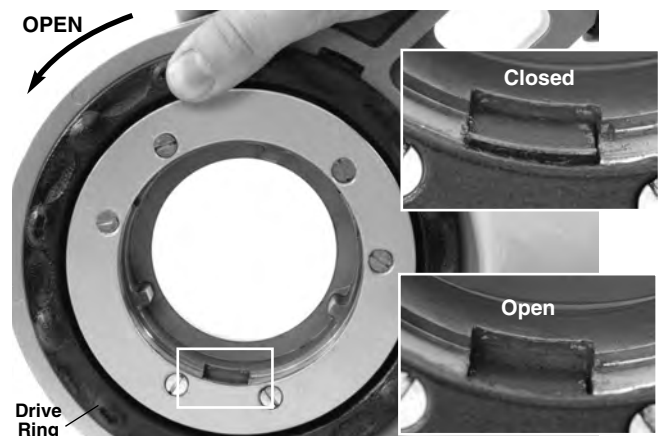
Retaining Mechanism, Drive Ring in the Open/Closed Position
